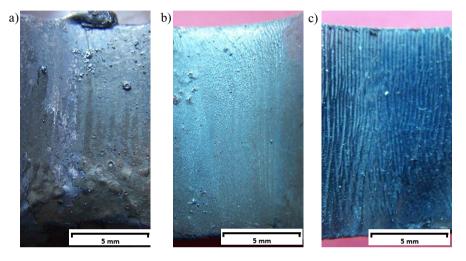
Appearance of surfaces of thermally cut holes: (a) Oxy-fuel; (b) Plasma; (c) Laser.
